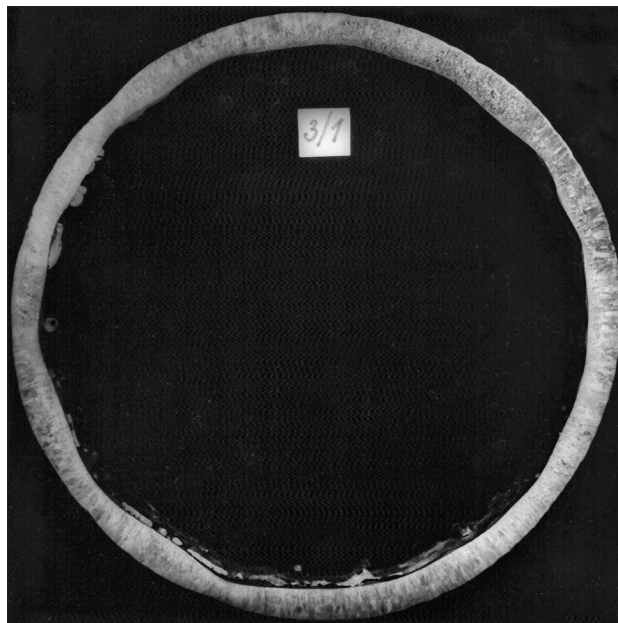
Sectional view through cast shell after breakout (etching), distance from the meniscus – 600 mm, carbon content – 0,1 %
